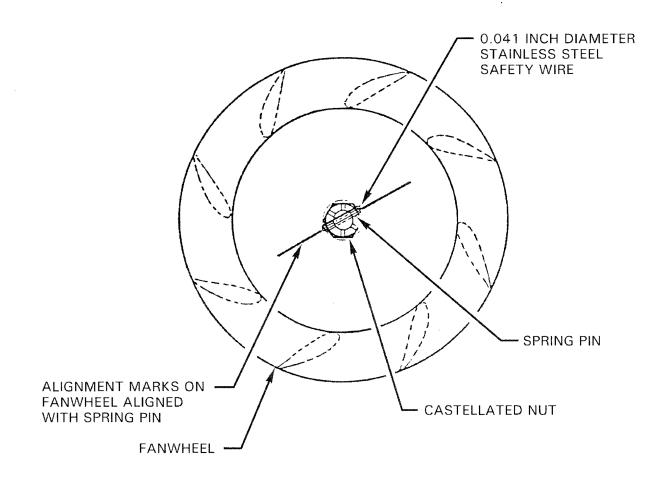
FANWHEEL ALIGNMENT MARKS
